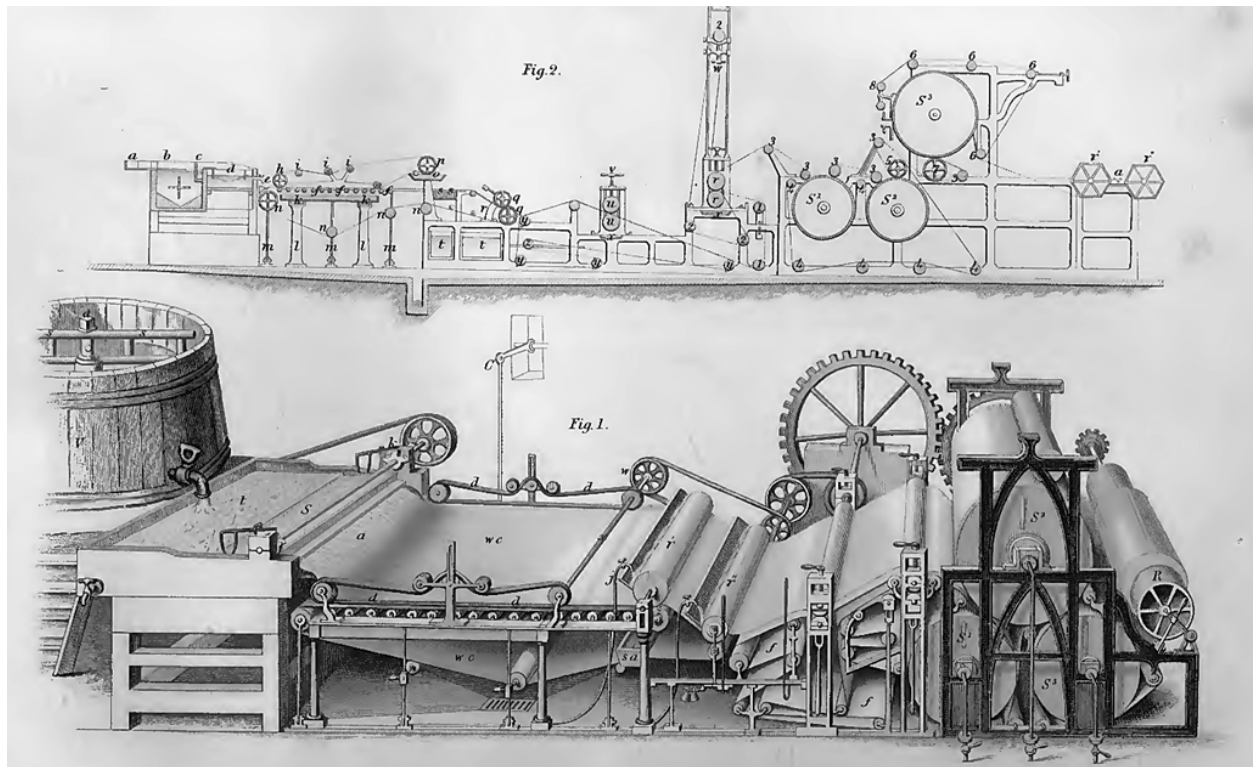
Early paper making machine (Tomlinson, 1854, p.364b)
